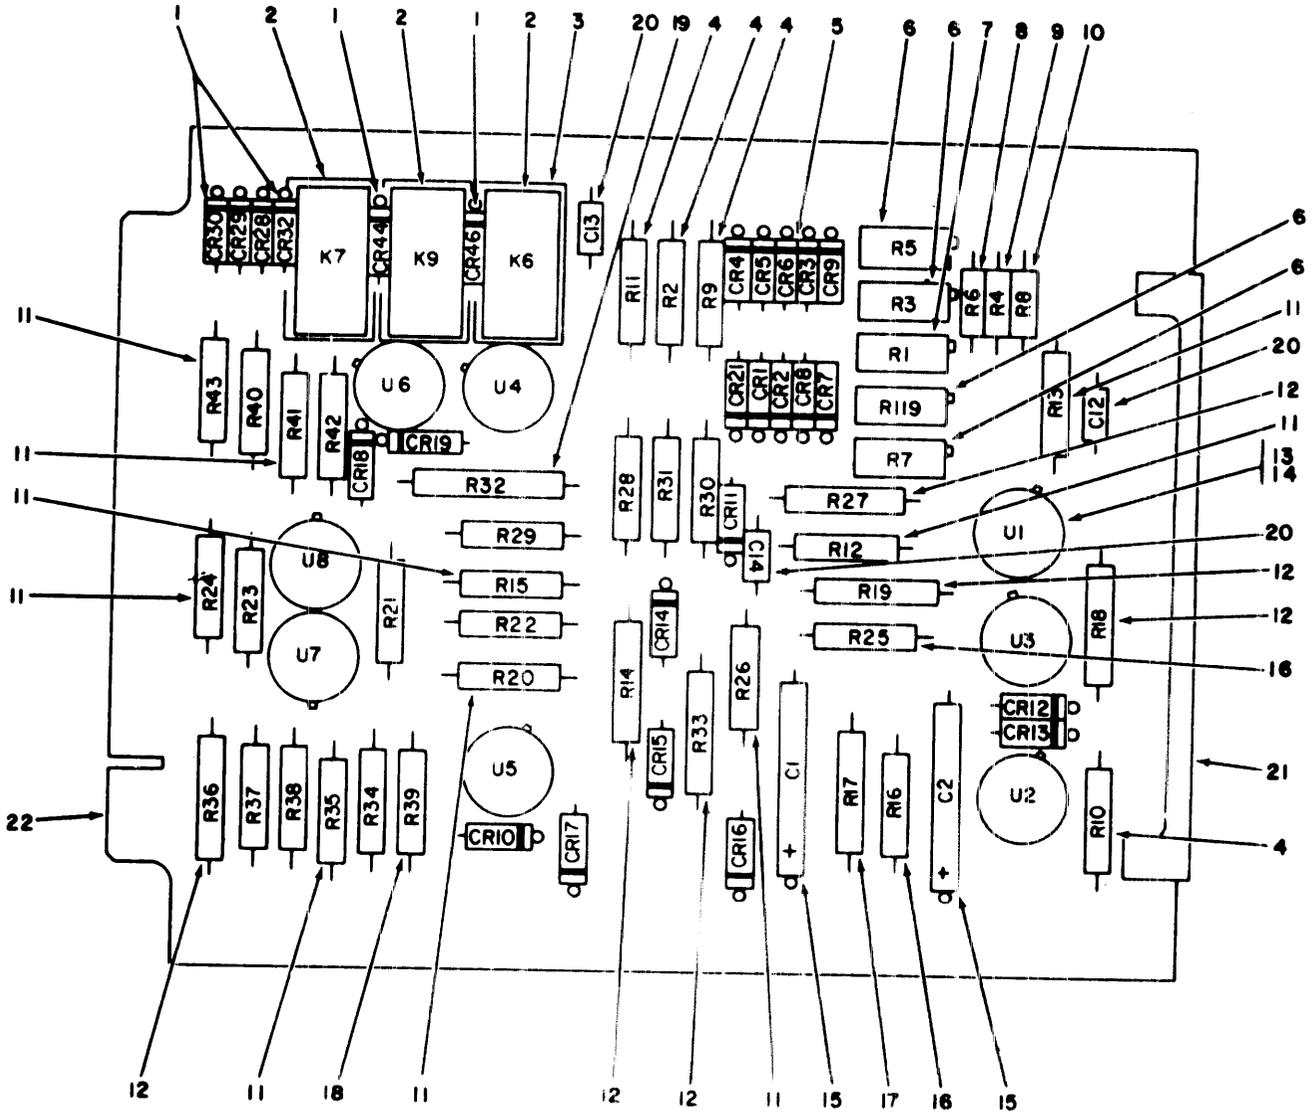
Circuit Cord Assembly A1 Component Location Diagram.
